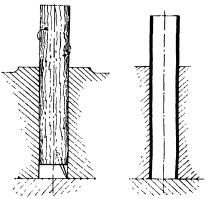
METHODS OF SCRIBING THROUGH DEEP HOLES ON TO SURFACES FOR DRILLING The end of the tube in the right-hand example is smeared with colouring matter.
